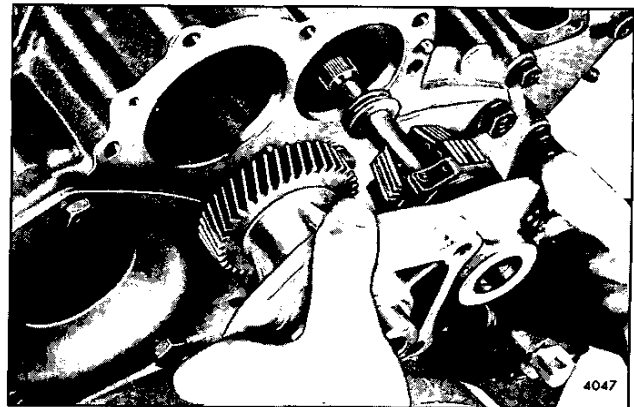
Removing/Installing Blower Drive Support (6V Engine)
